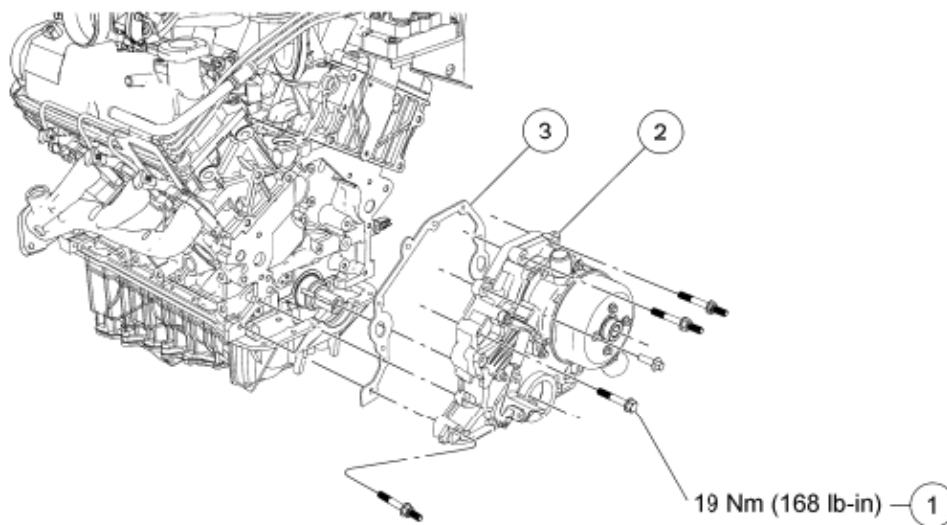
Identifying Engine Front Cover Components With Torque Specifications
